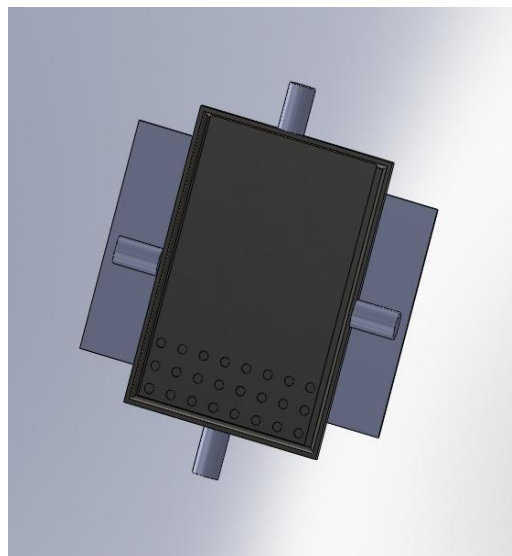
SolidWorks drawing of foosball design using preexisting monkey board.
